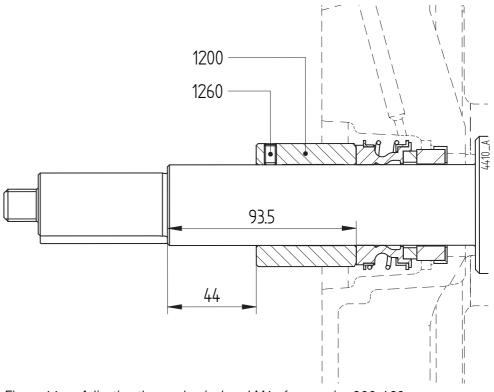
Adjusting the mechanical seal M1 of pump size 200-160.
